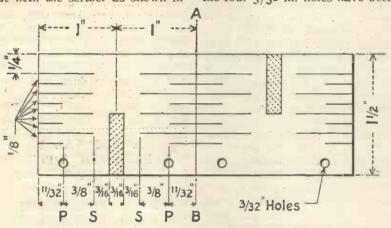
The lay-out and drilling dimensions of the ebonite sheet.
